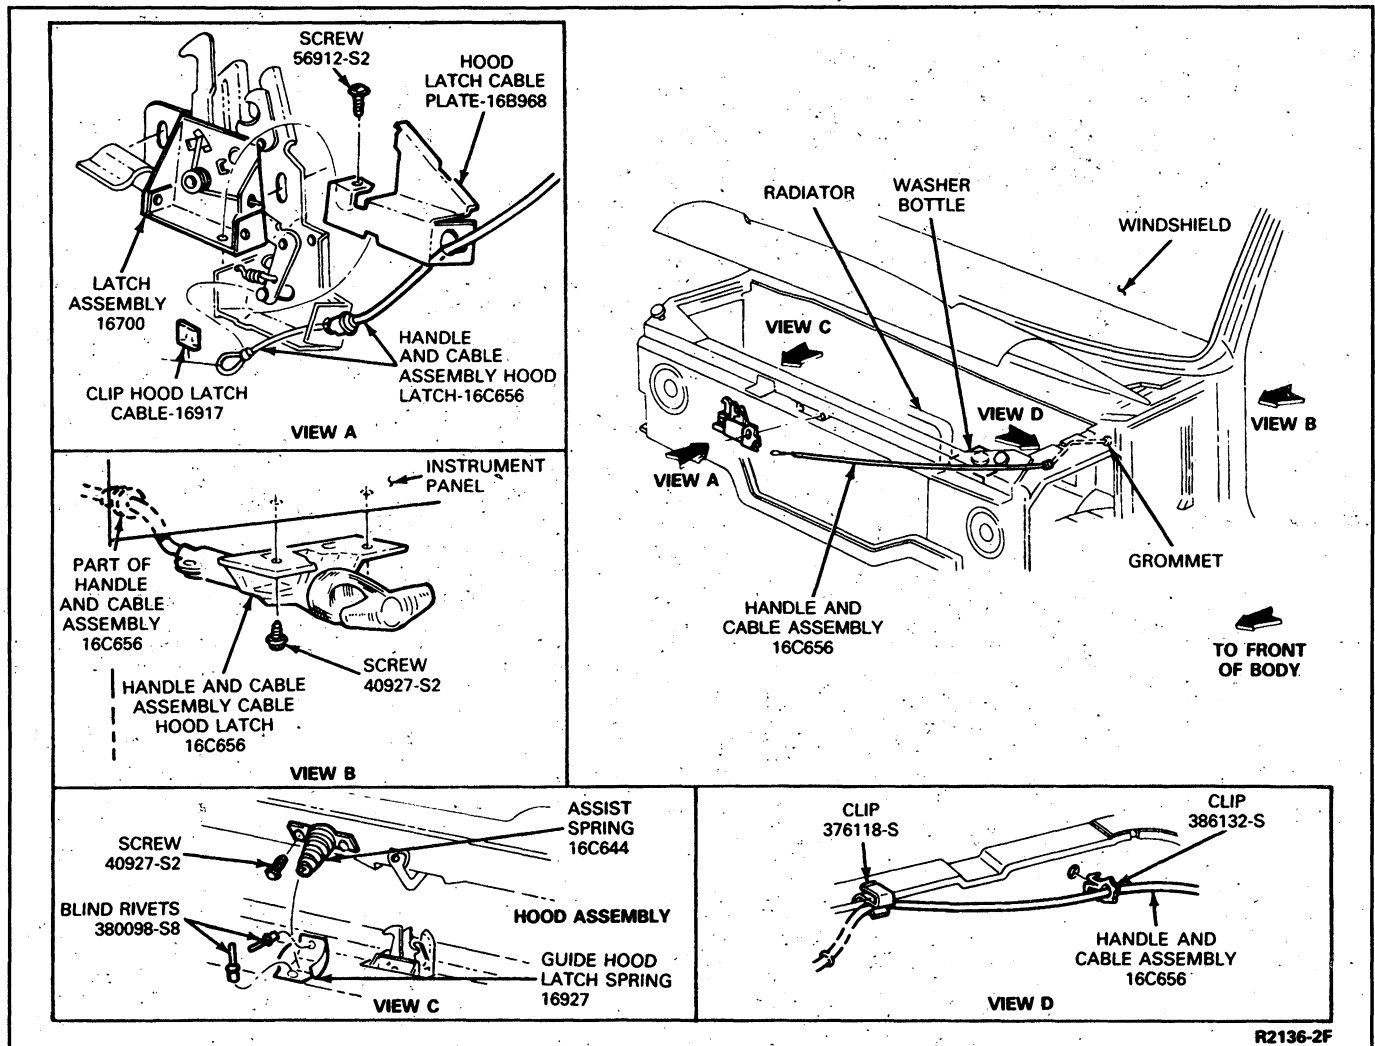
Hood Latch Remote Control Cable and Lock—E-150 Through E-350
